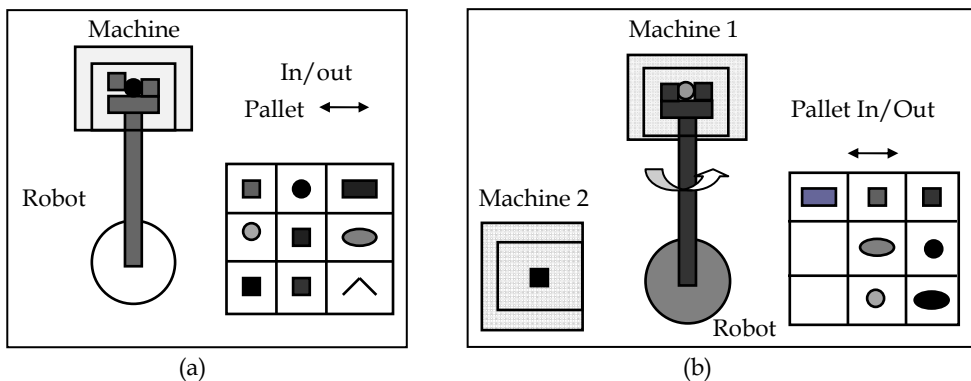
Flexible manufacturing cells: (a) one machine, a robot and a pallet; and (b) two machines, a robot and a pallet
